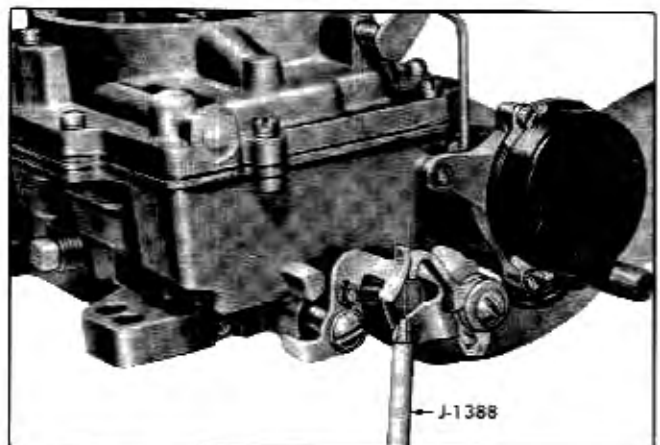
B-98 Checking Secondary Throttle Lever Adjustment
